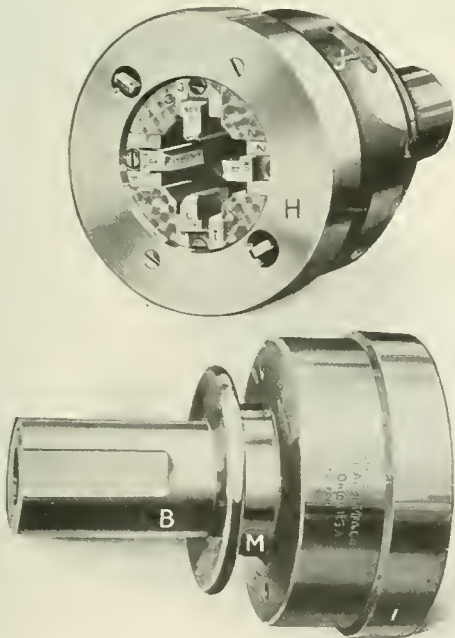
National-Acme Opening Die for Screw Machines with Rotating Threading Spindles
